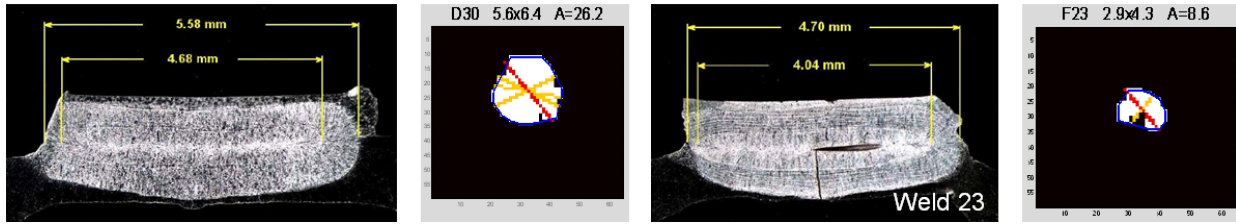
Metallographic images obtained for two of the weld buttons on the truck door pictured in Figure 4. A vertical crack and a void in the weld nugget are visible in the metallographic image of Weld 23 (right-hand image). Thresholded and dimensioned ultrasonic frequency-ratio images obtained for the same welds are also shown.
